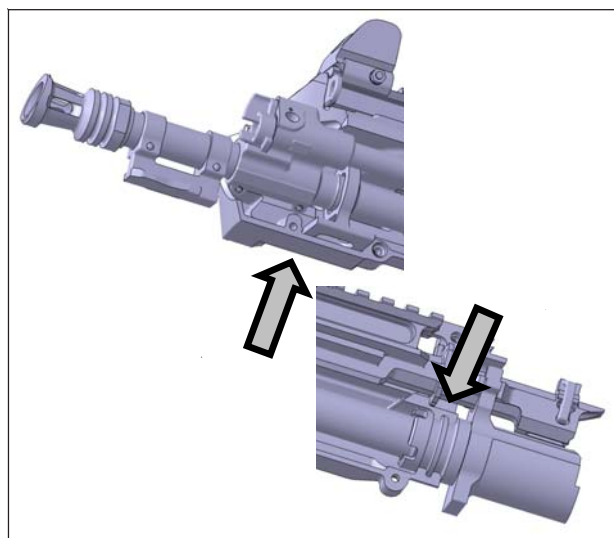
y - Positioning the barrel group assembly in the right side plate
